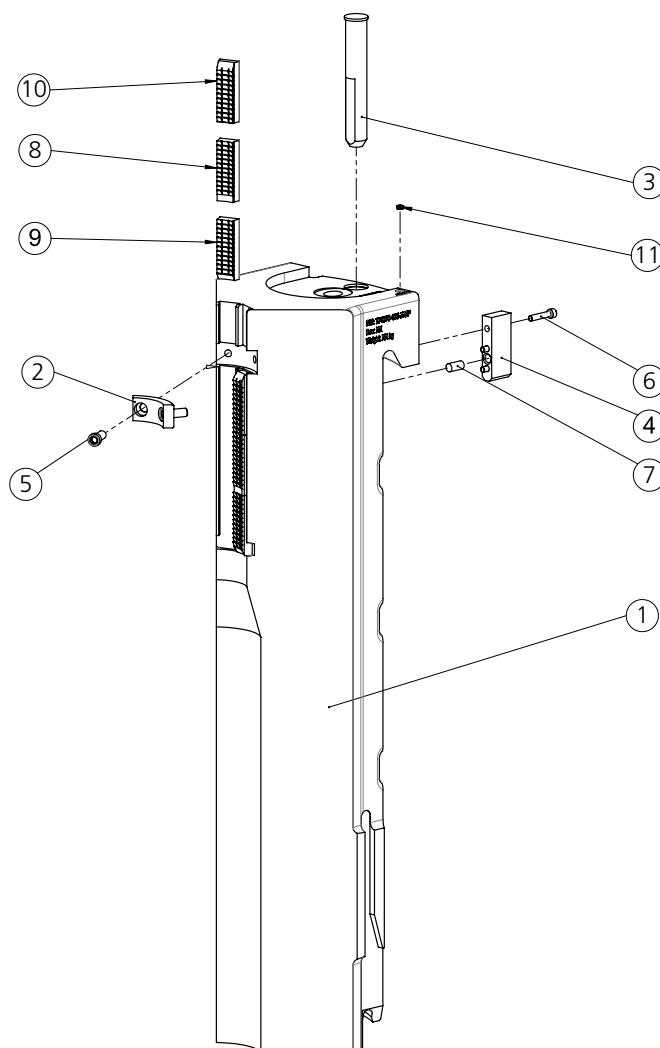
774090-BC* Carrier Assembly Drill Collar without Zip Groove
